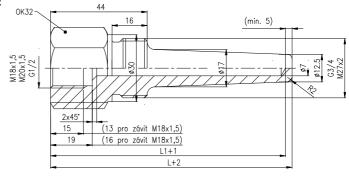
DIMENSIONAL DRAWING, TABLE OF DESIGNS AND WEIGHTS OF THERMOWELLS, SHAPE 6 PURSUANT TO DIN 43772, EXTERNAL THREAD G3/4 AND M27x2
